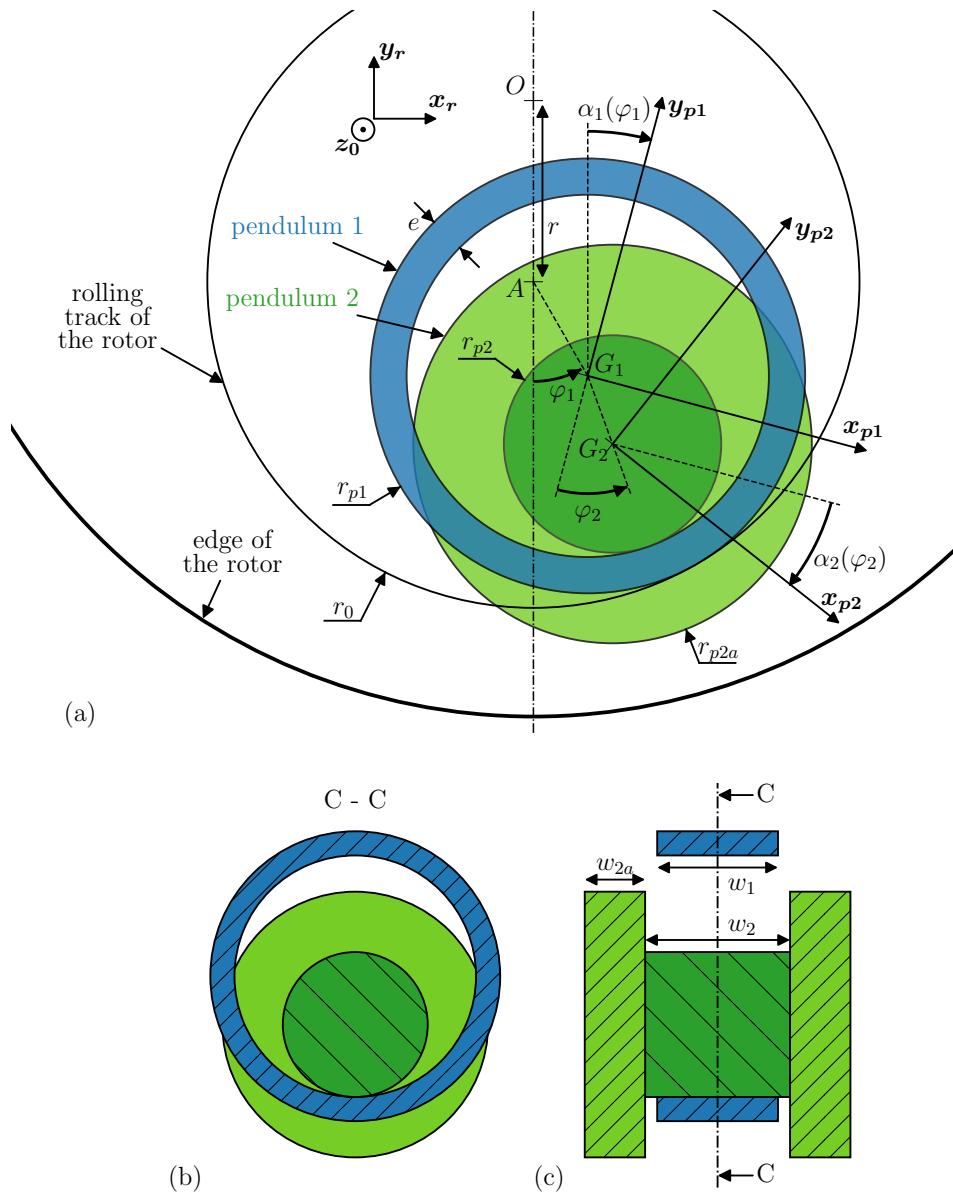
Front view (a) and side view (b) of a double pendulum rolling on the rotor.
